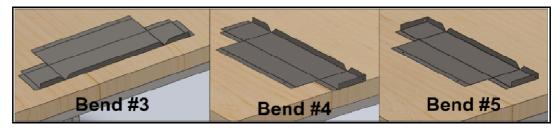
Bend #3 - Bend #5- Finished work piece after Bend #3, #4, and #5.
